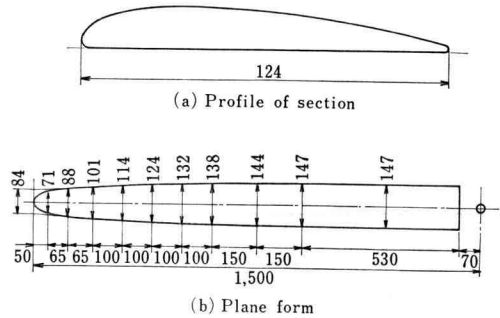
Drawing of the blade A2E (Electro Co. propeller) (dimension unit mm).
